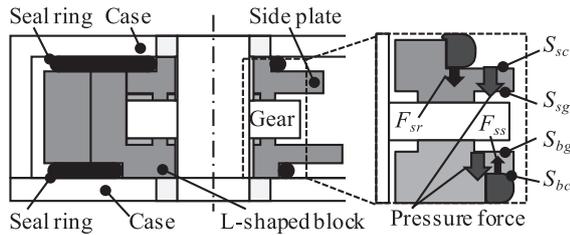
Cross-sectional view (Fig. 3(a) D-D) of gear pump and schematic of load to each part
